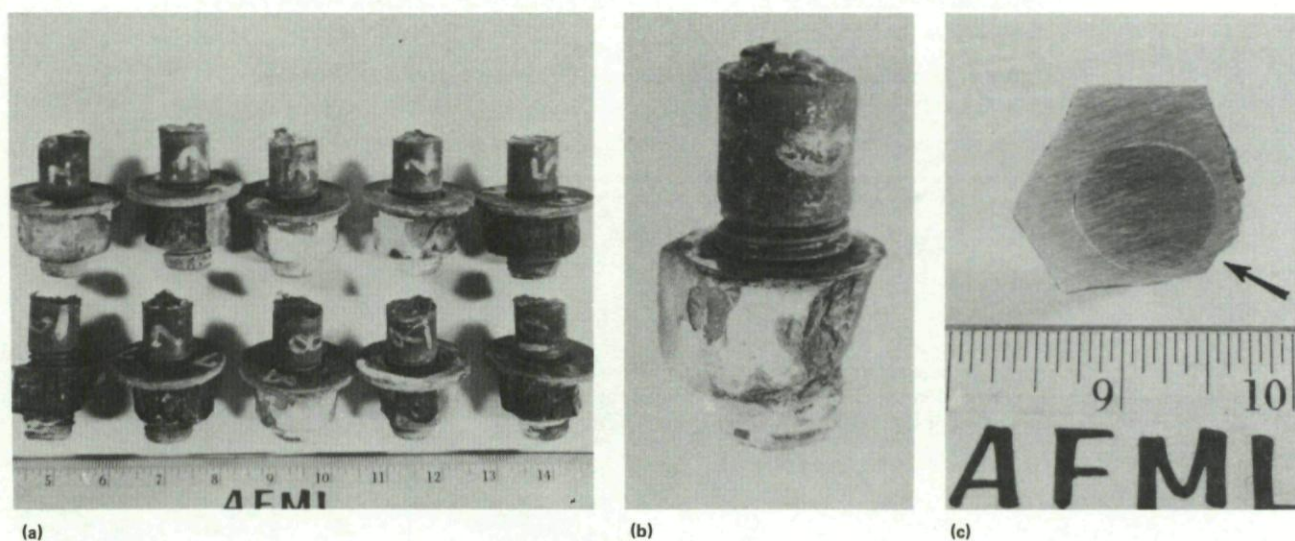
Corrosion of structural steel fasteners
